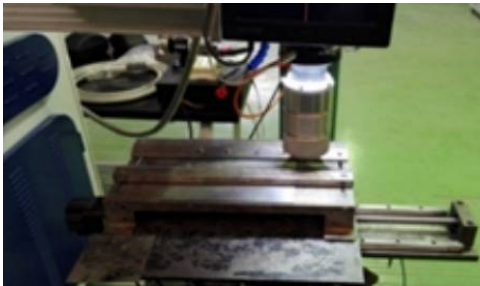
Laser welding machine for preparing welded sheet
